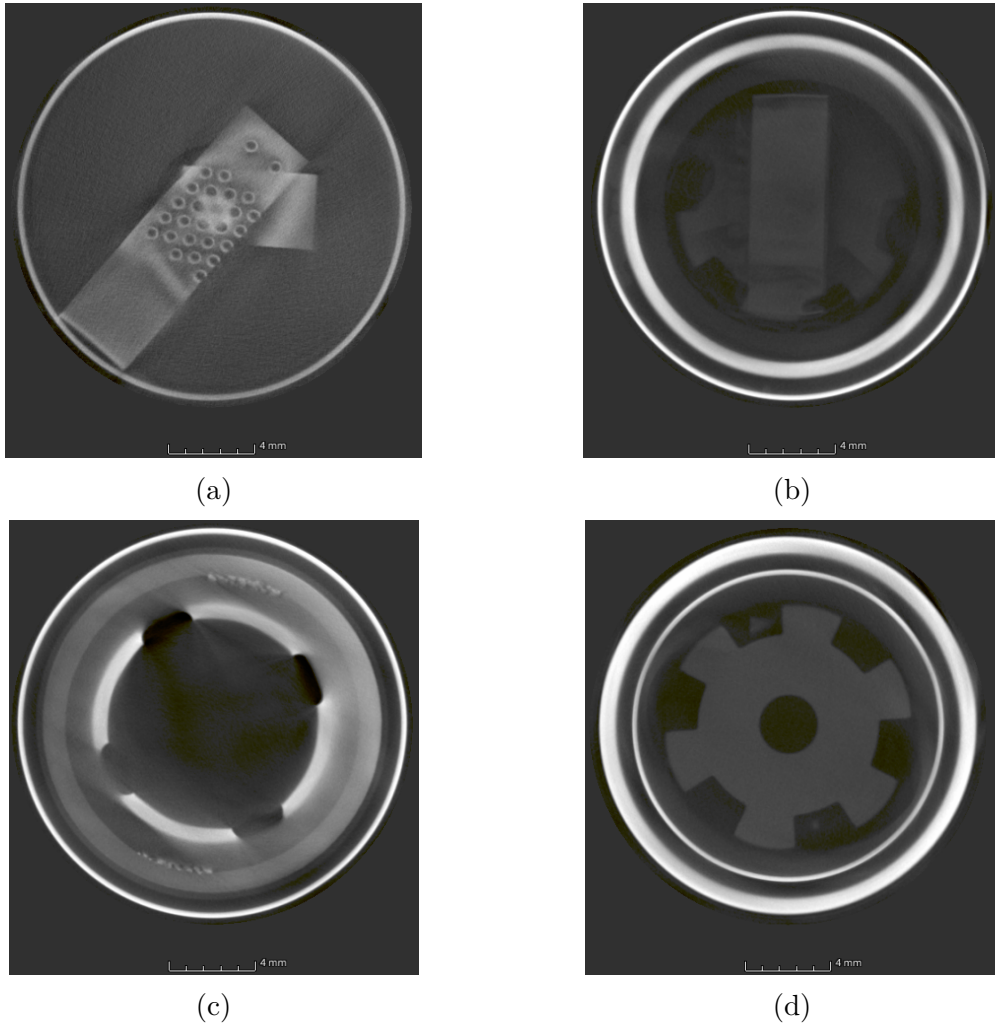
(a) Bottom tab weld; (b) top tab; (c) top tab weld; (d) cap insulation structure (gear-shaped) of Cell 11.
